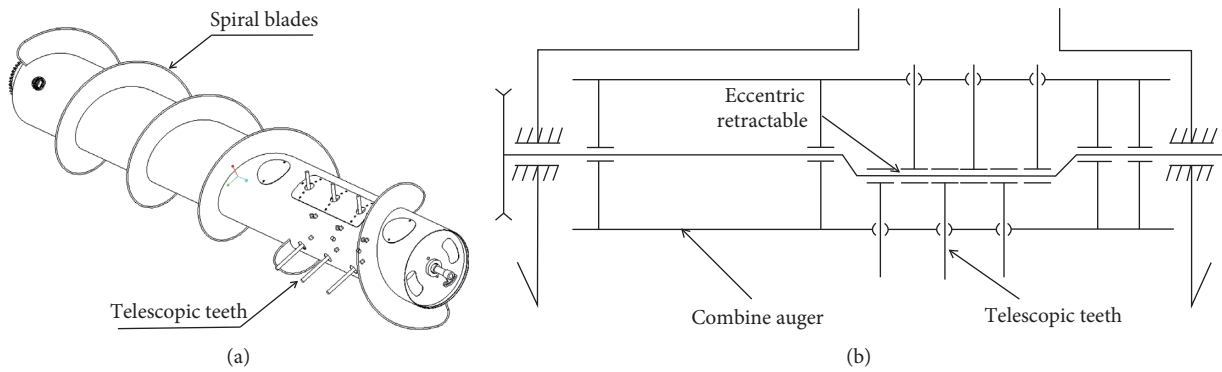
Structure and schematic of the combine auger. (a) Assembly of the combine auger. (b) Eccentric retractable gridded fingers.
